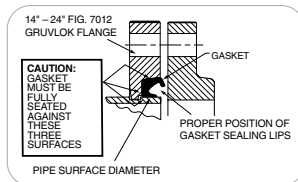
Gruvlok® Flange (14"–24") (Continued)
